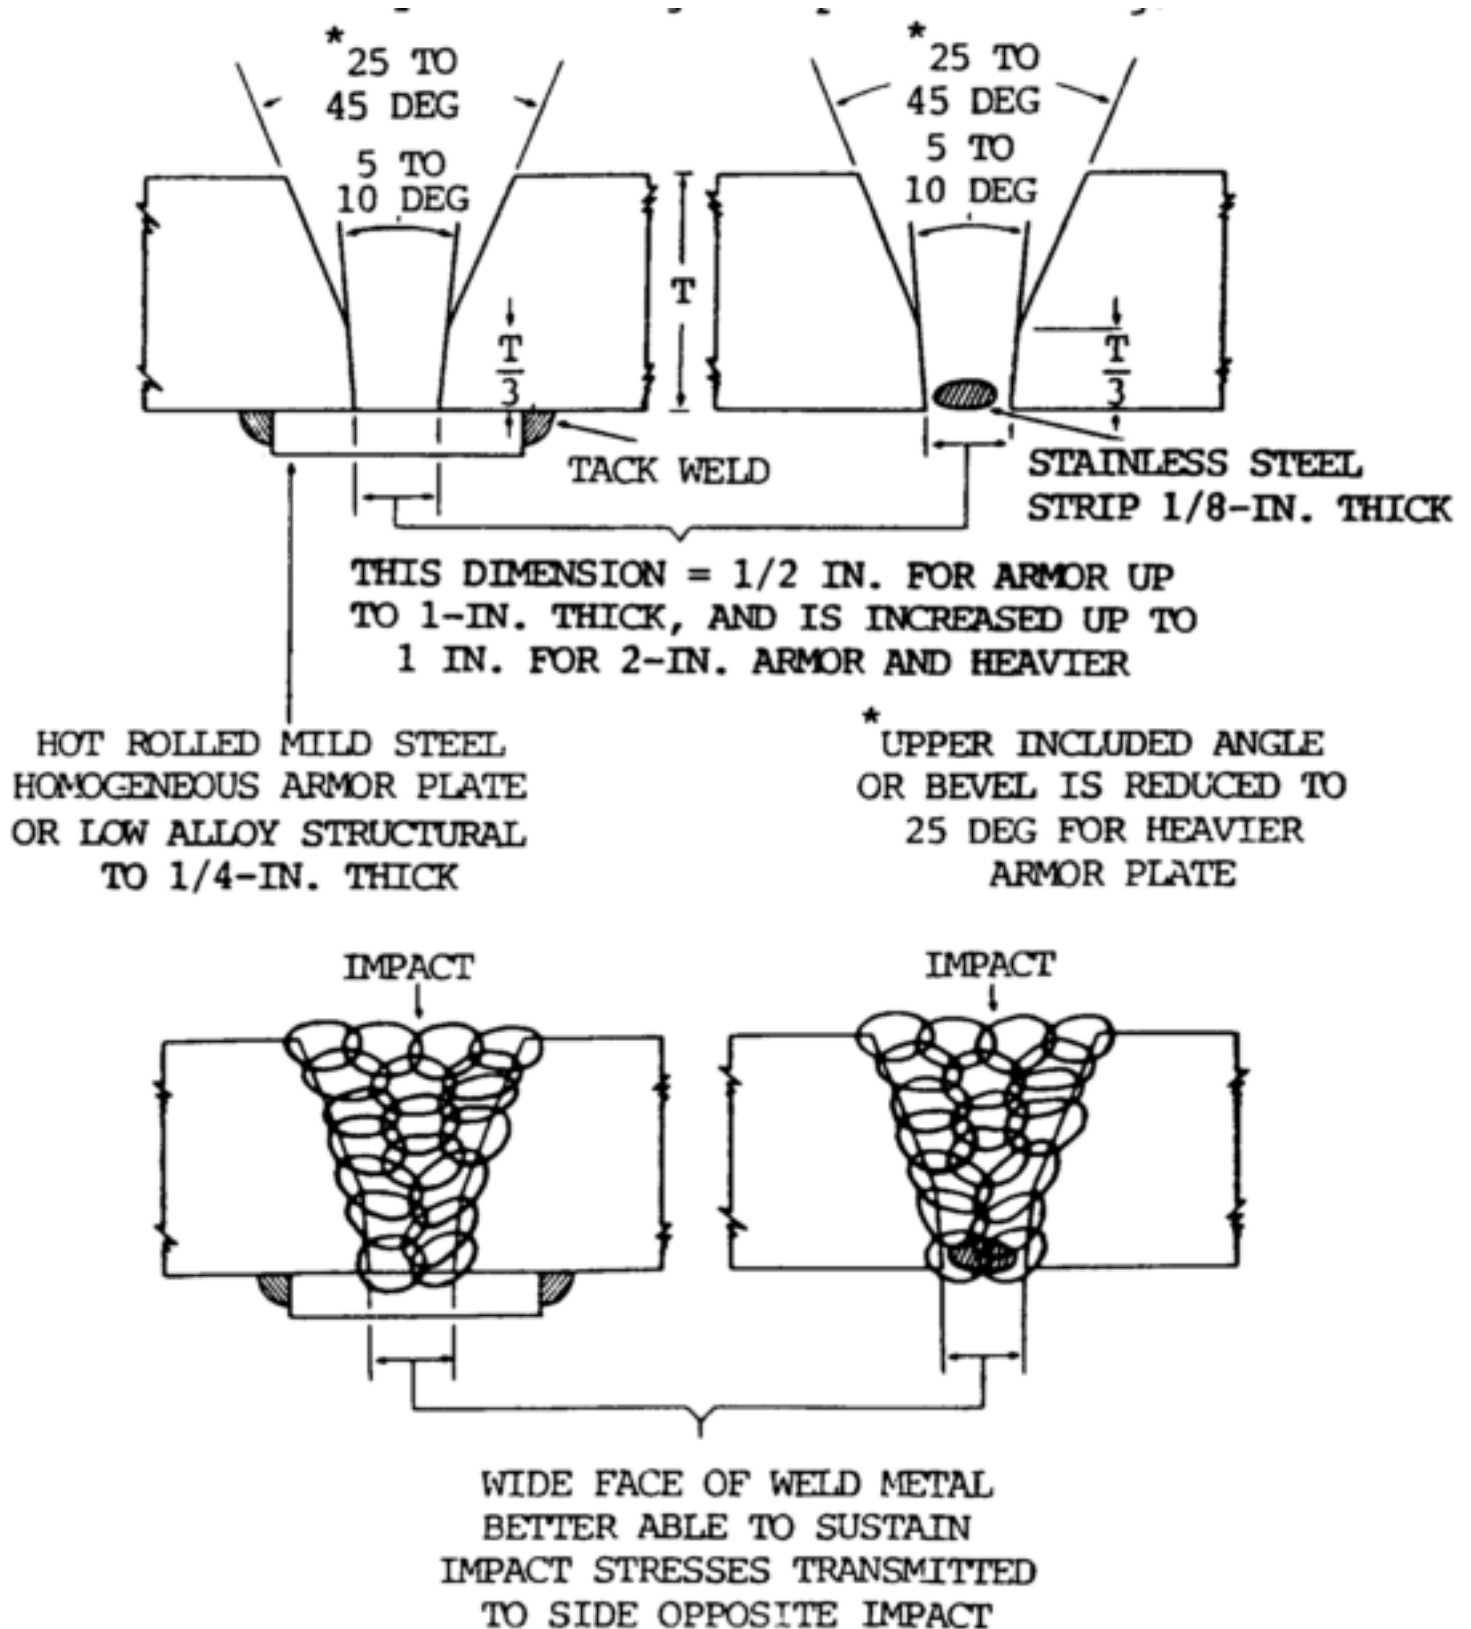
Procedure for welding single V joint on homogeneous armor plate.
